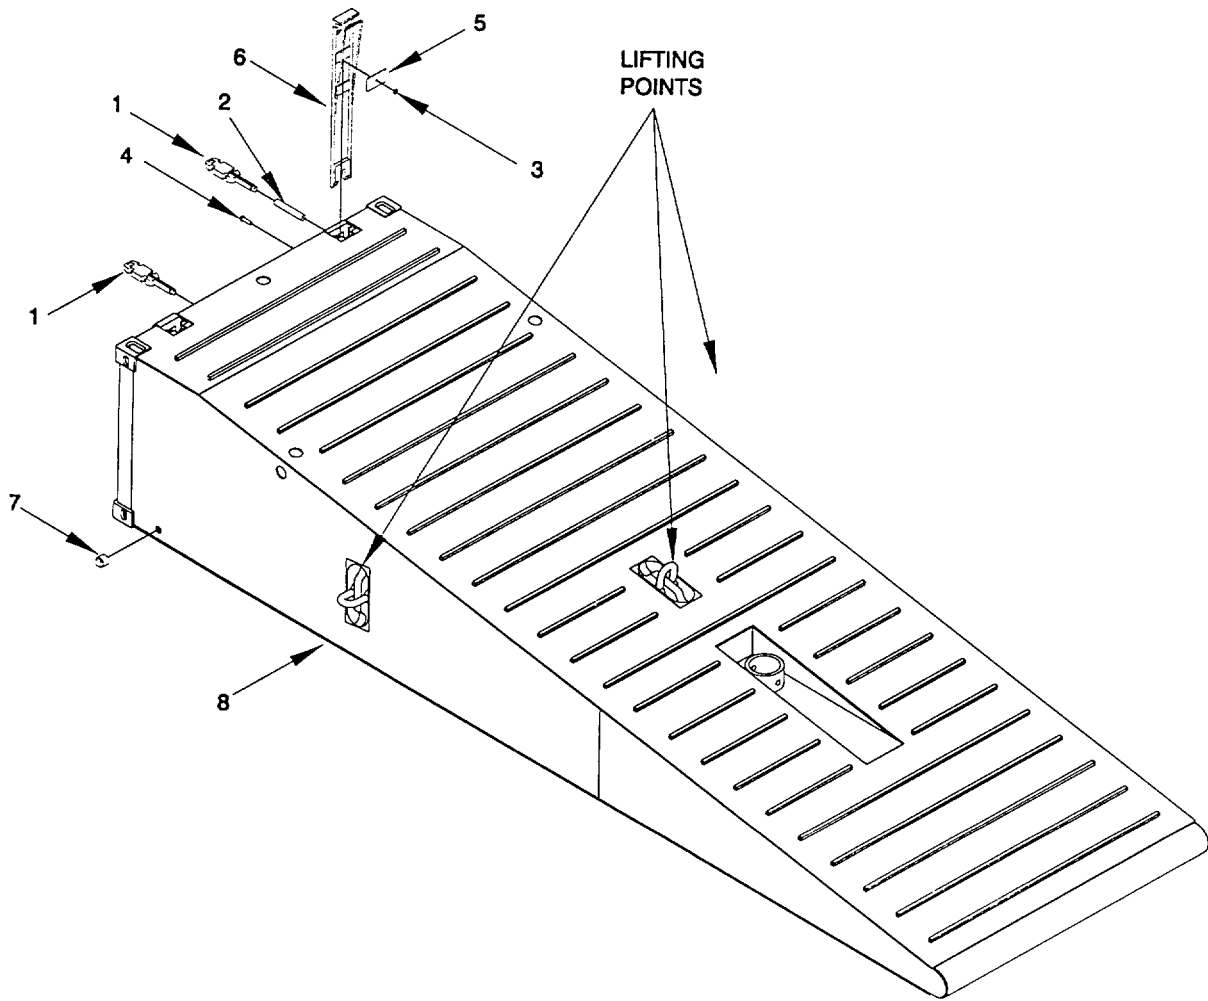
P25B Beach End Module Assembly, Service/Repair.
